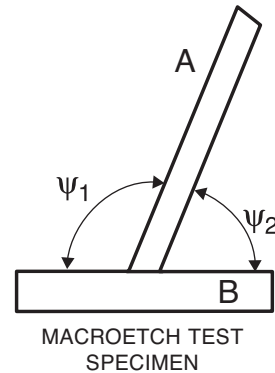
Positions of Test Plates for Fillet Welds (see 7.8.3)
